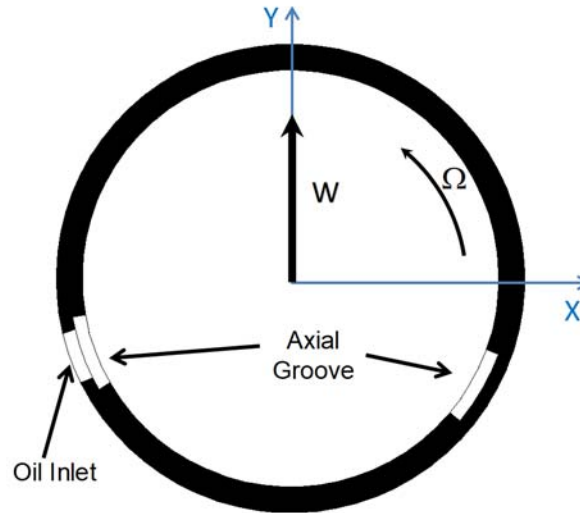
Simplified drawing of the bearing installed in the steel forming machine, with the load directed upwards.
